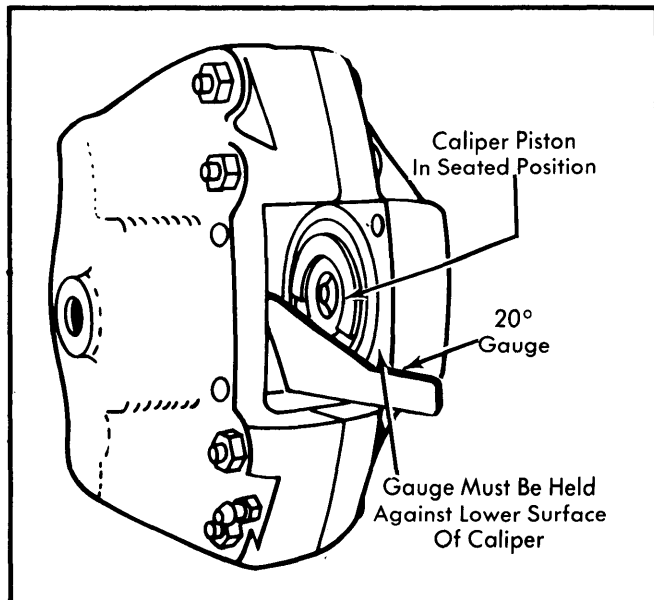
Using a 20° Gauge to Properly Position Piston in Caliper Bore
